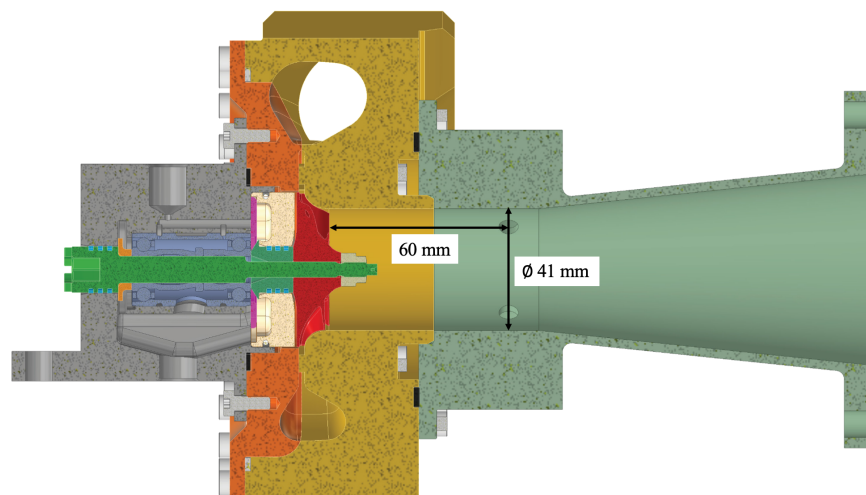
Section view of the ORCHID turbine highlighting the rotor outlet measurement section diameter and location. Adapted from [2]
